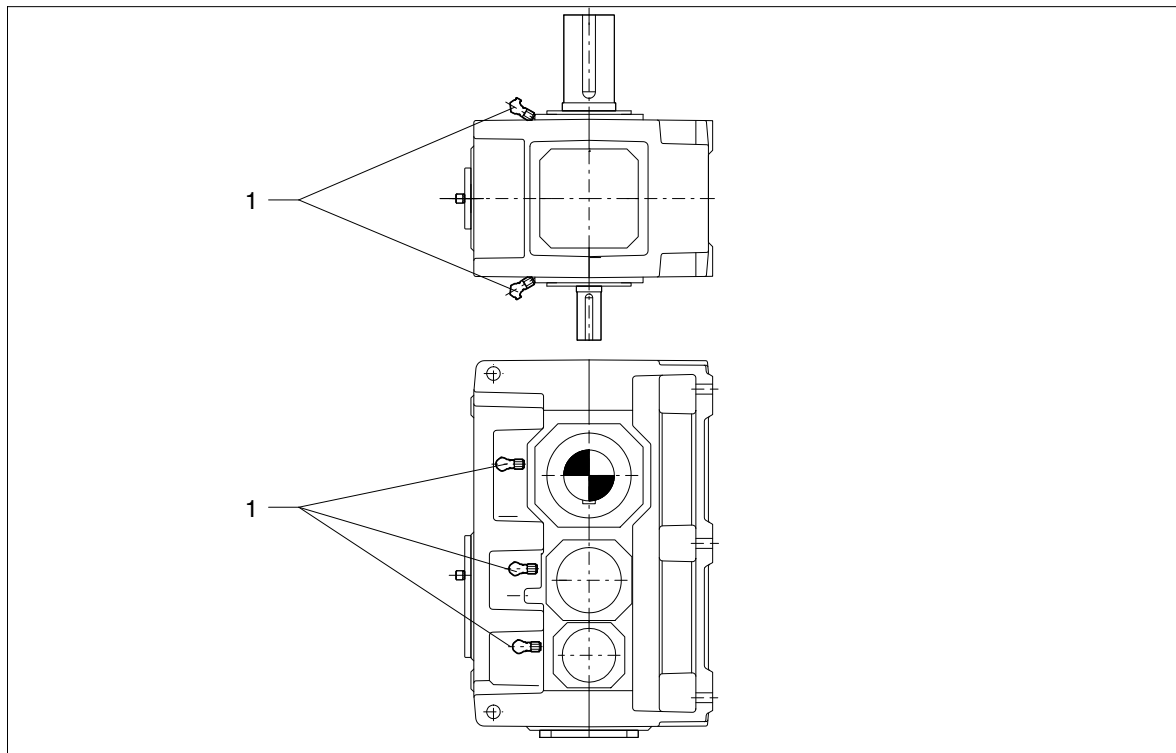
Bearing monitoring by Pt 100 resistance thermometer on gear units type H2.V
